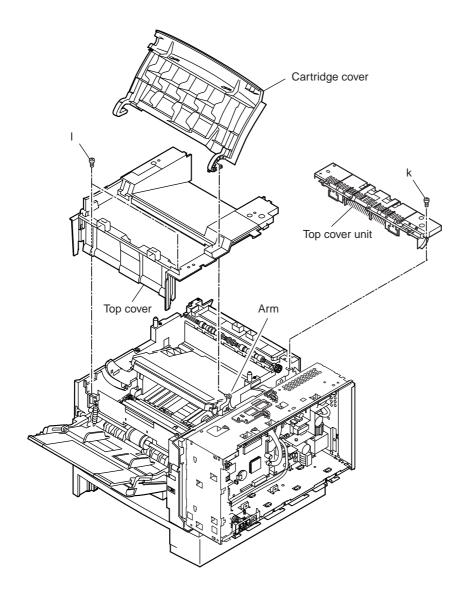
Paper Pick-up Roller (multi-purpose) 4
